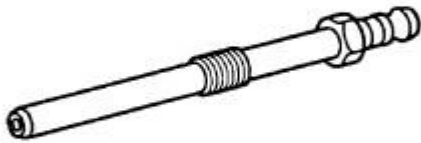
REMOVER, FUEL INJECTOR - 9552
